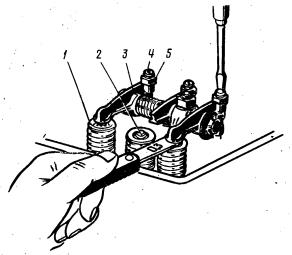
Adjusting Valve-to-Rocker Clearance:
